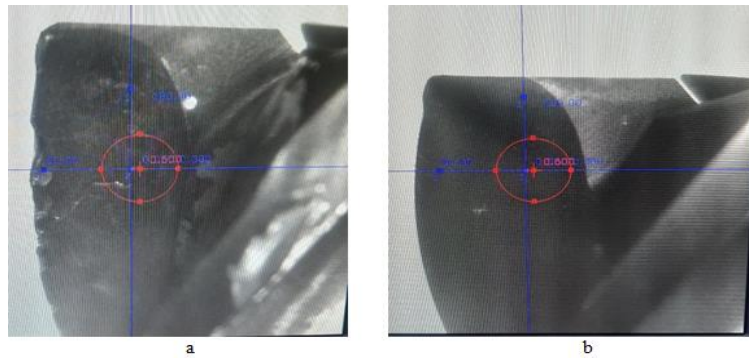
Images obtained on Zoller equipment for a mill cutter cutting edge - infrared light method: a) non uniform wear - magnification 12 x; b) new cutting edge; – magnification 10 x.
